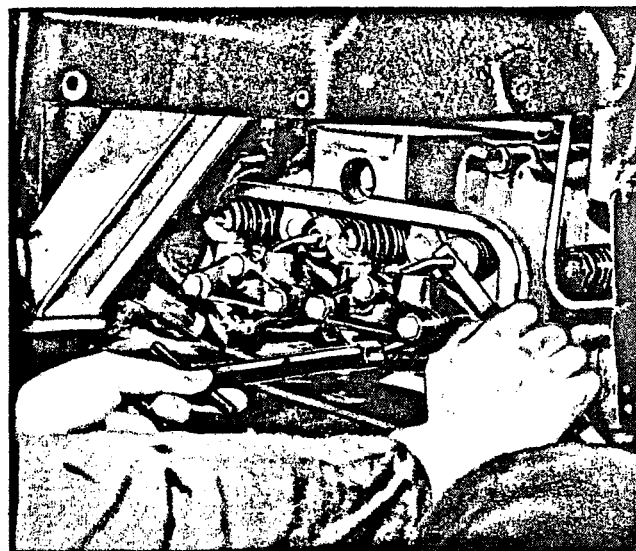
Adjusting the Clearance between Valves and Rockers
